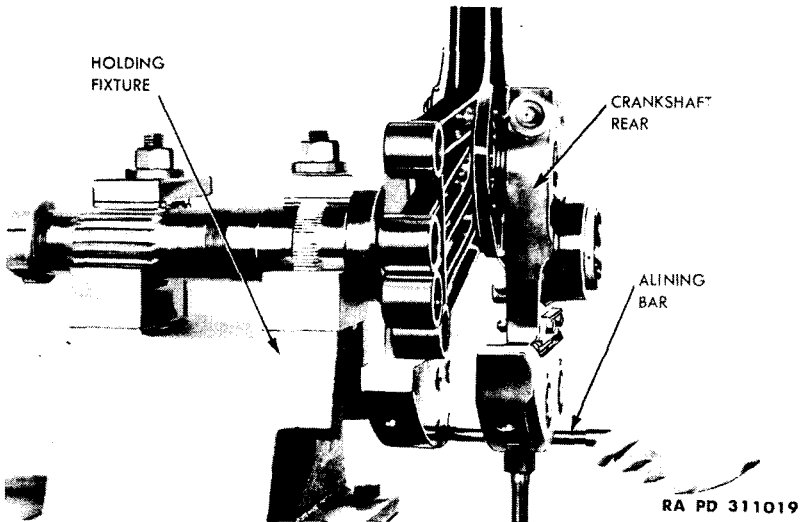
Checking Crankshaft Alinement, Using Fixture 5A2296 and Alining Bar 5A2290
